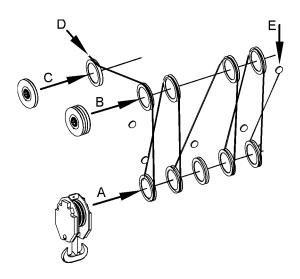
2316 jib head section rope reeving system (load position 1)
